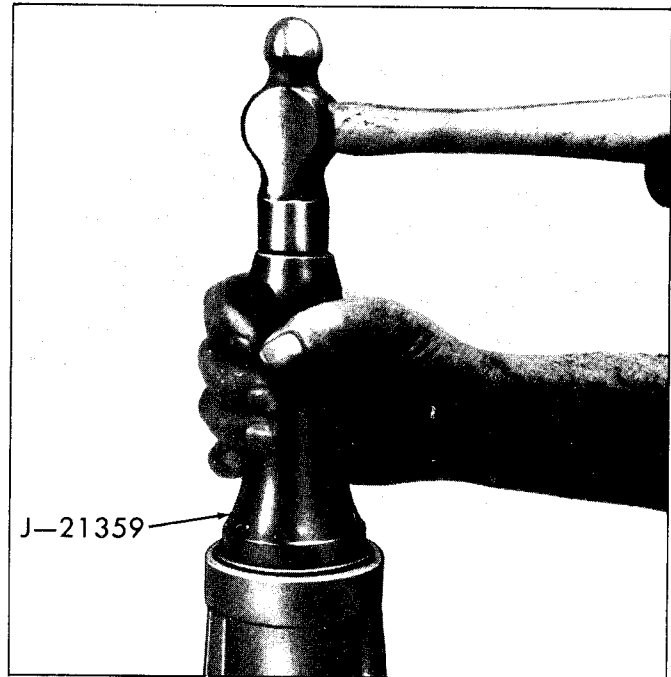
B-16K--Installing Drive Gear Bearing Retainer Seal
